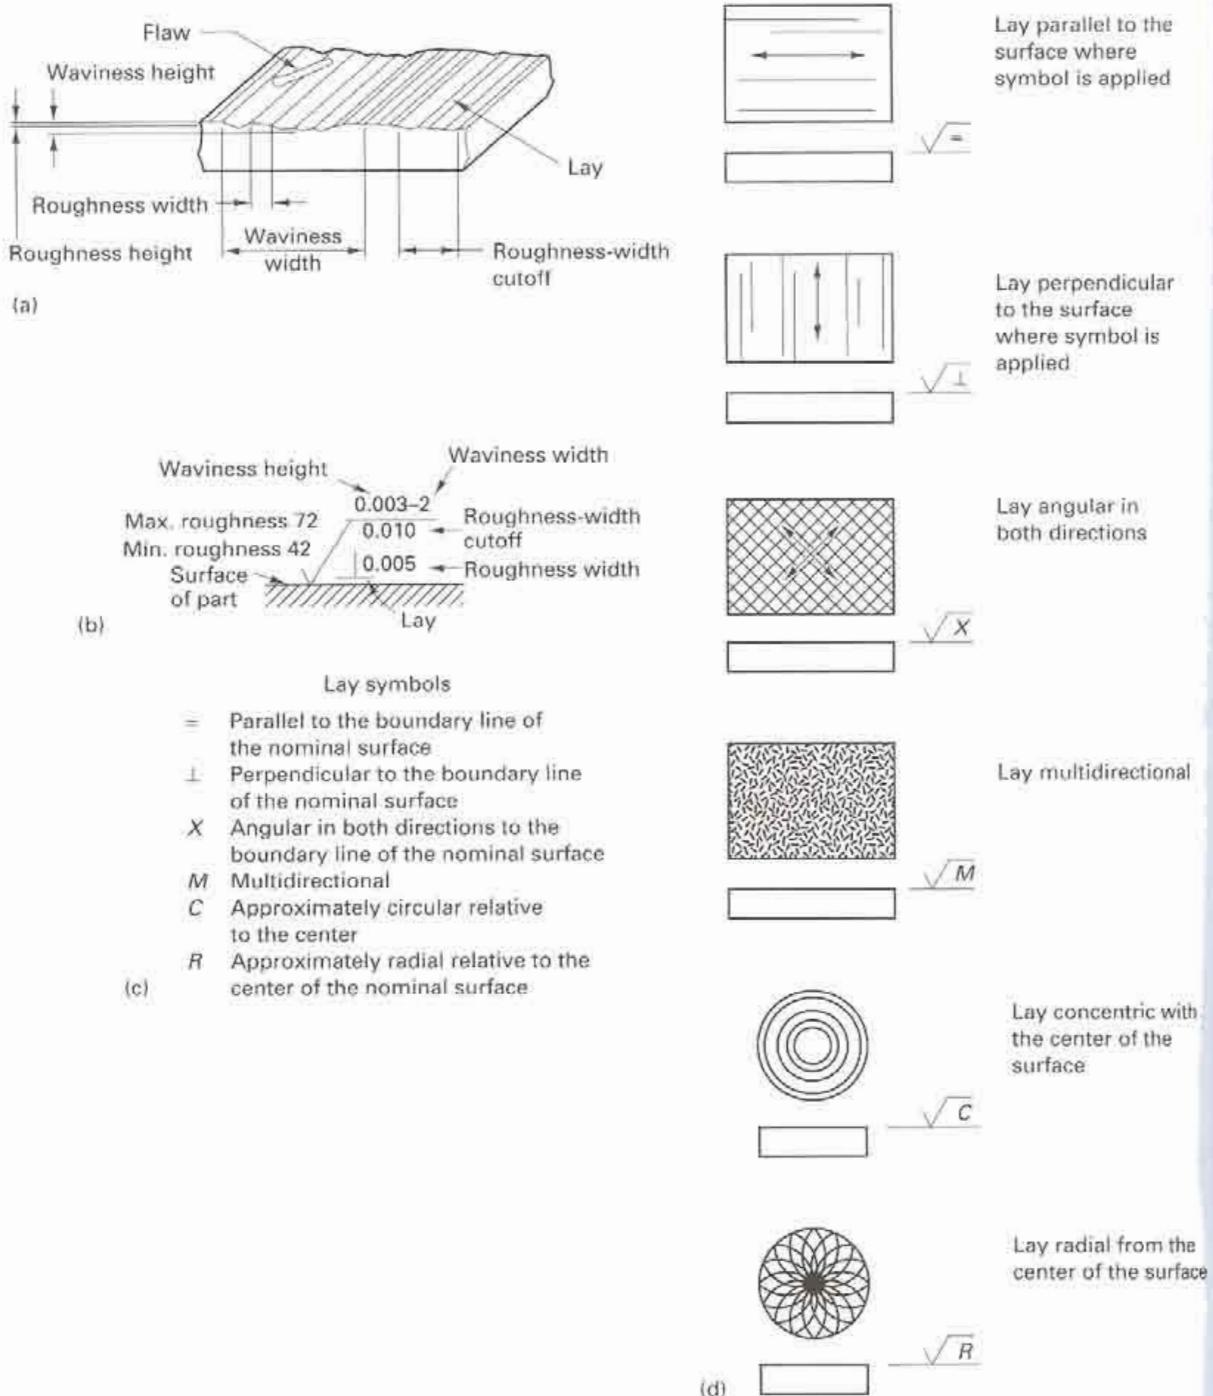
(a) Terminology used in specifying and measuring surface quality; (b) symbols used on drawing by part designers, with definitions of symbols; (c) lay symbols; (d) lay symbols applied on drawings.
